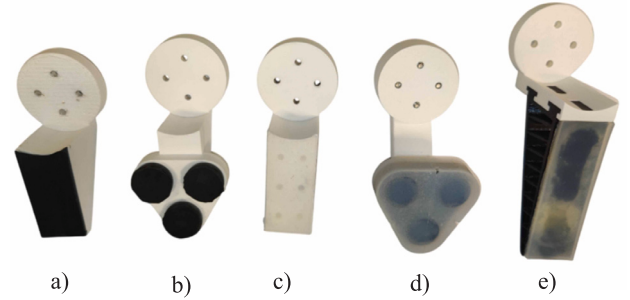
Finger designs: (a) flat fingers, (b) adaptive fingers, (c) flat fingers with a soft layer, (d) adaptive fingers with a soft layer, (e) Fin Ray fingers.
